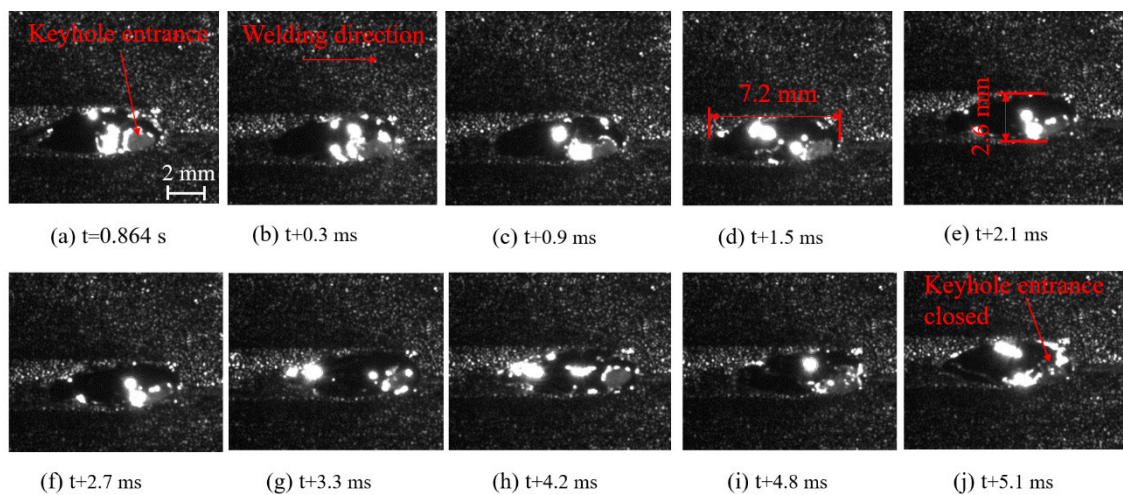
Dynamic change process of the weld pool and keyhole entrance during laser welding with both top and bottom shielding gases ($p_{\text{laser}} = 2000 \text{ W}$, $v = 1.2 \text{ m/min}$, $\Delta = +3 \text{ mm}$, $q_{\text{top}} = 20 \text{ L/min (N}_2\text{)}$, $q_{\text{bottom}} = 20 \text{ L/min (N}_2\text{)}$).
